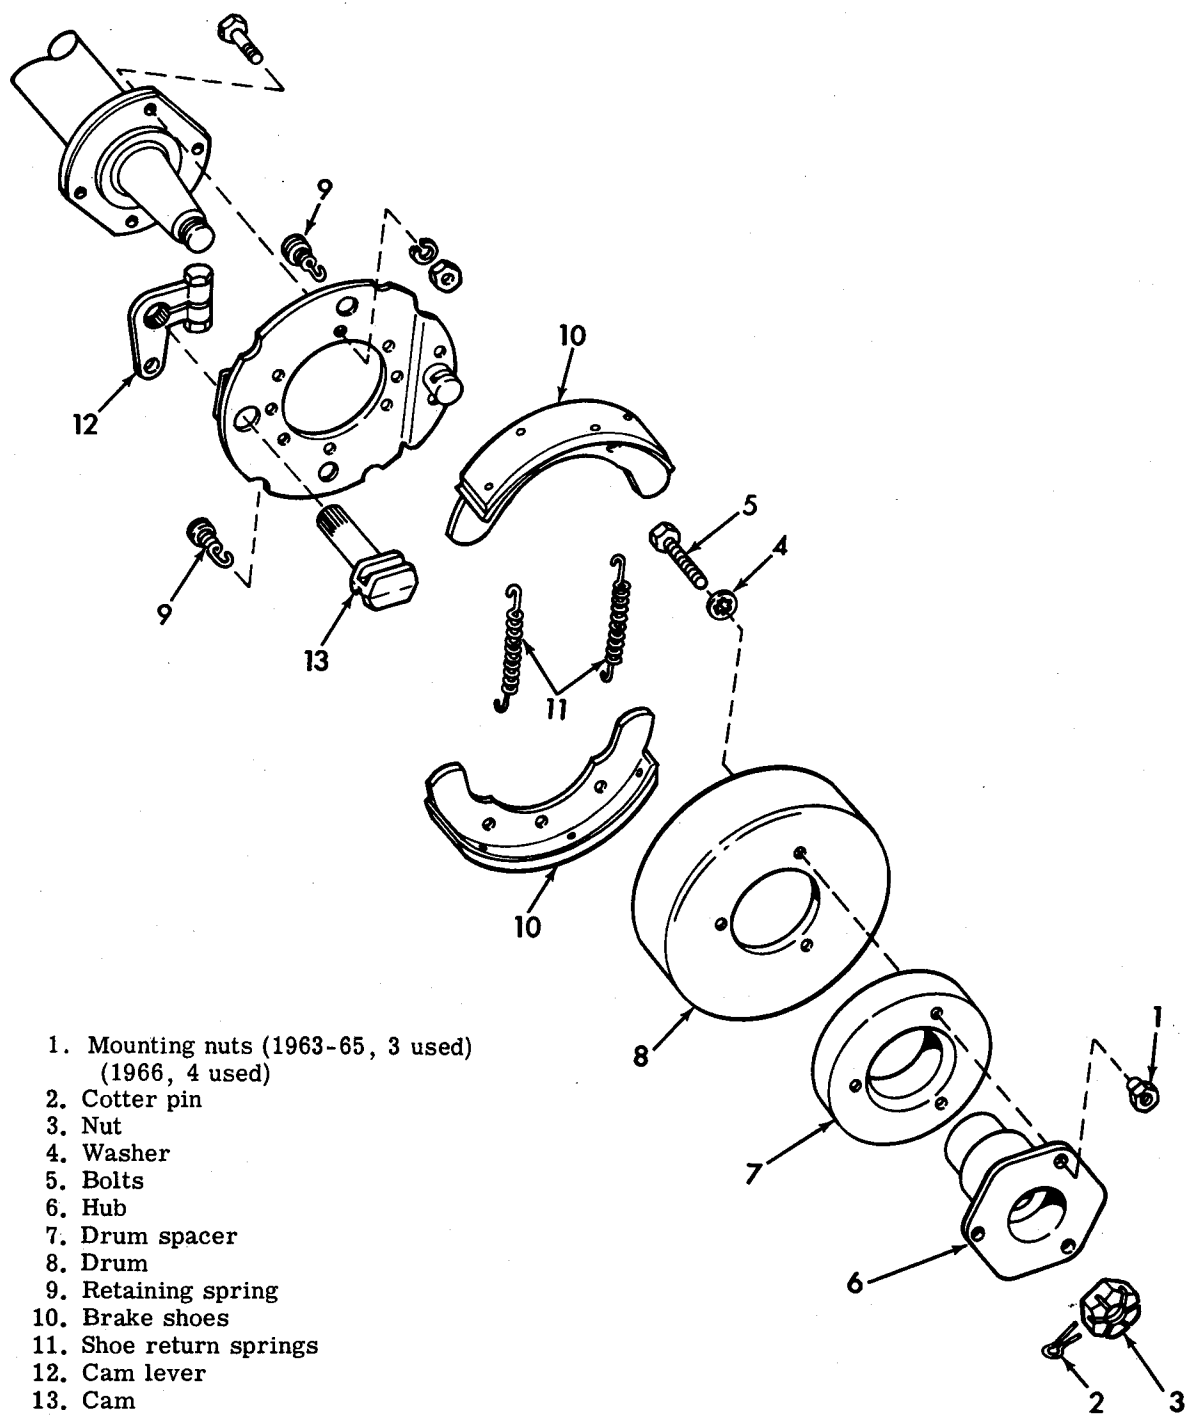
Mechanical Drum Type Brake - Exploded View
